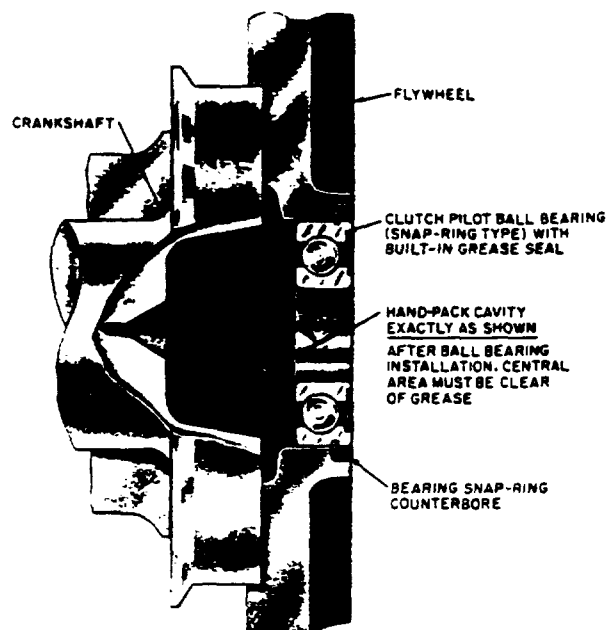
Cut-away View of Clutch Pilot Bearing Grease Reservoir Correctly Packed
